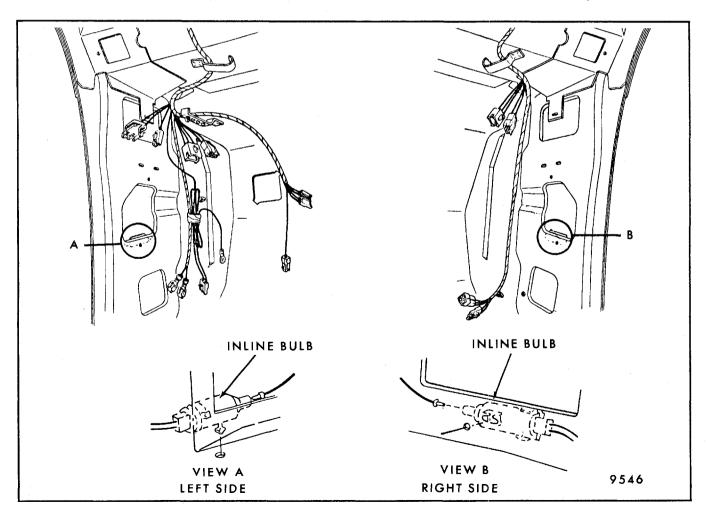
Illuminated Lock Cylinder In-line Bulbs - Oldsmobile Styles
